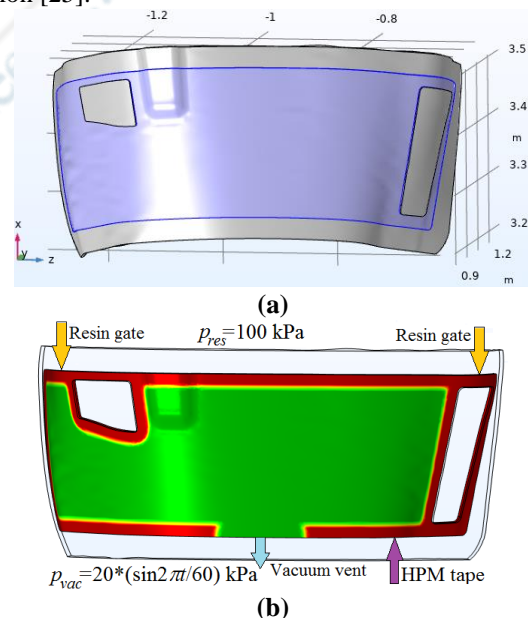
Geometry of modeled infused system: CAD model of the preform assembly with the mold (a); process layout - HPM tape, inlets and outlet location (b).
